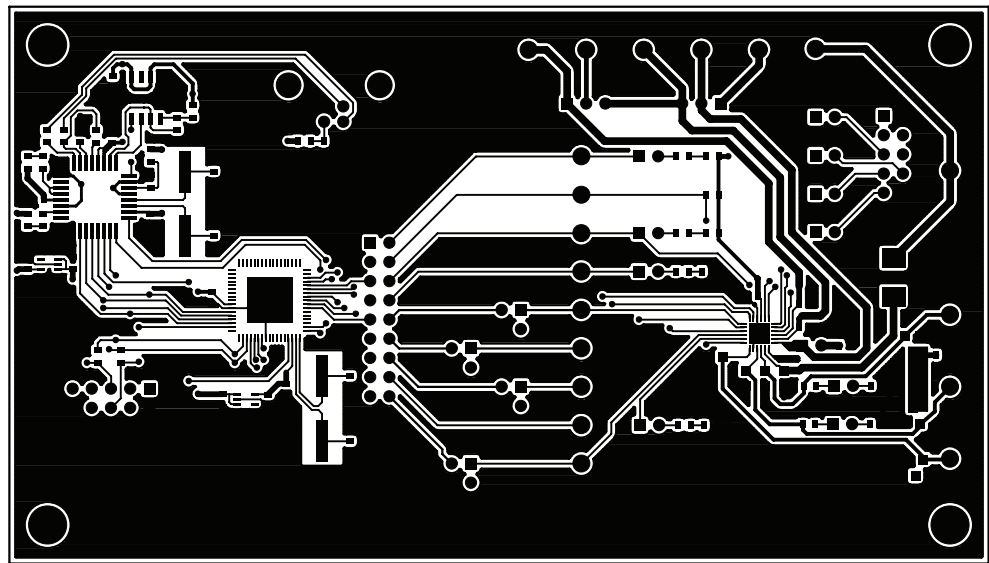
MAX14820 EV Kit PCB Layout—Component Side
